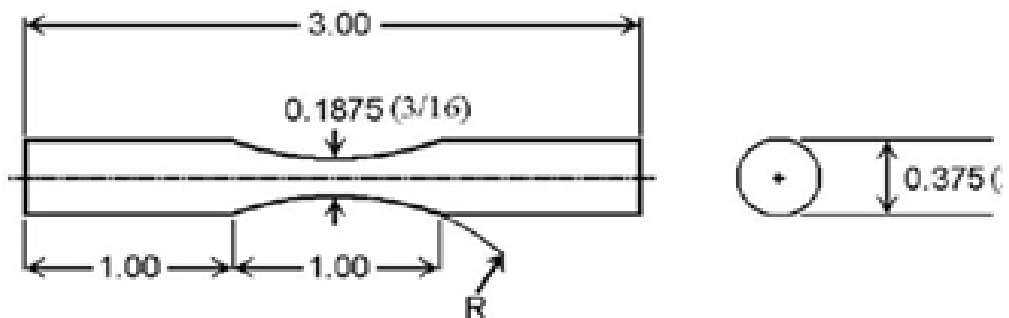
RBF specimen dimensions according to the RBF machine requirements. Dimensions shown in inches
